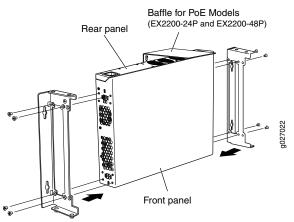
Attaching Wall-Mount Brackets to a Switch Chassis
